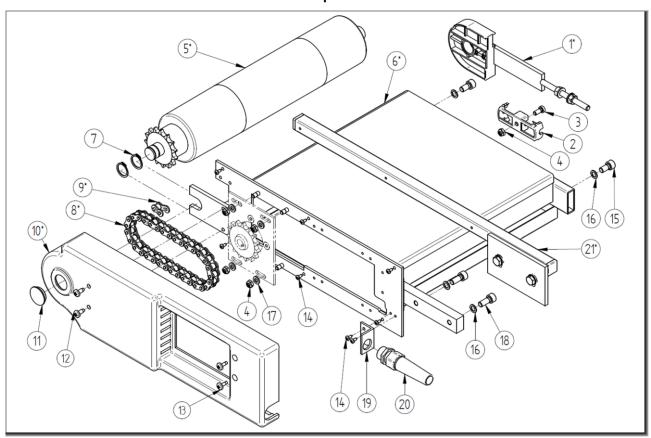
Parts list: Internal drive unit - drive unit - position of drive unit 14 - ZZ.900.0148.00
